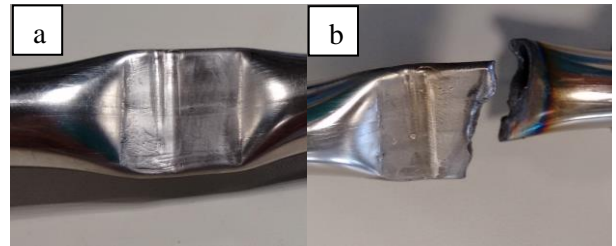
Weld cutting. a) Before, b) after.
